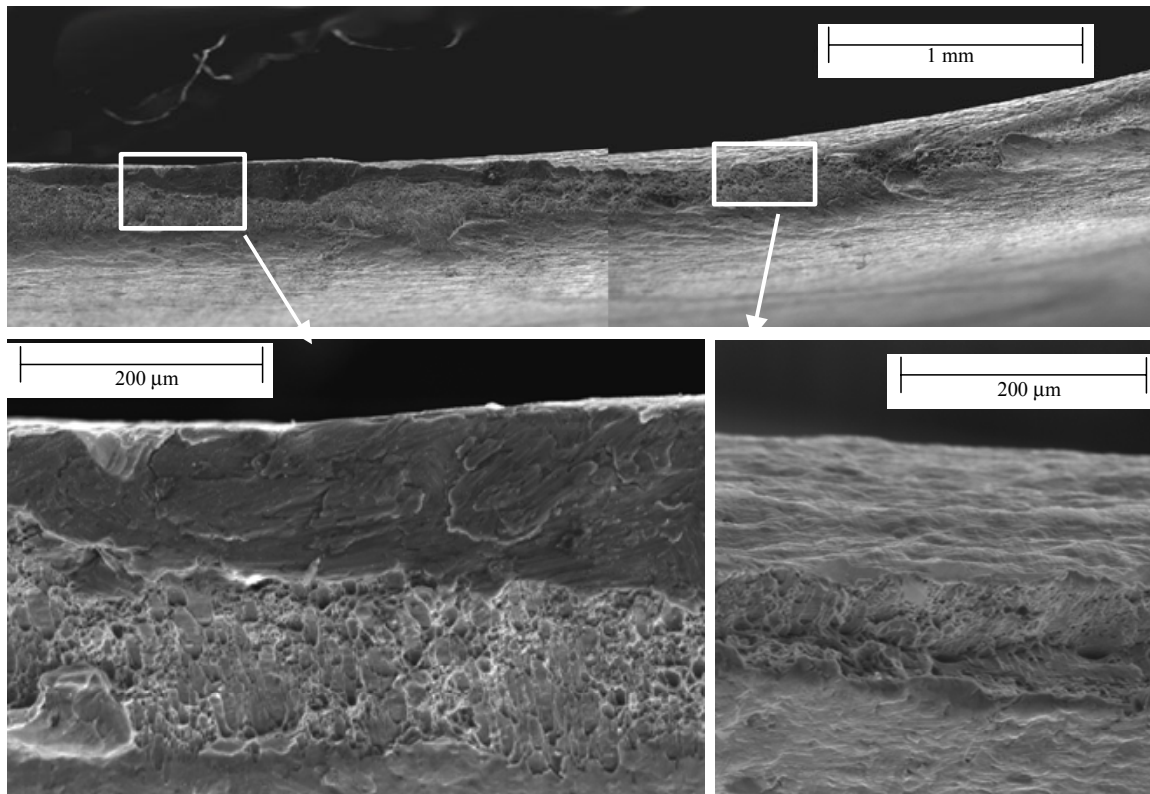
Fracture surface an AA5754 quasi-static tensile sample.
